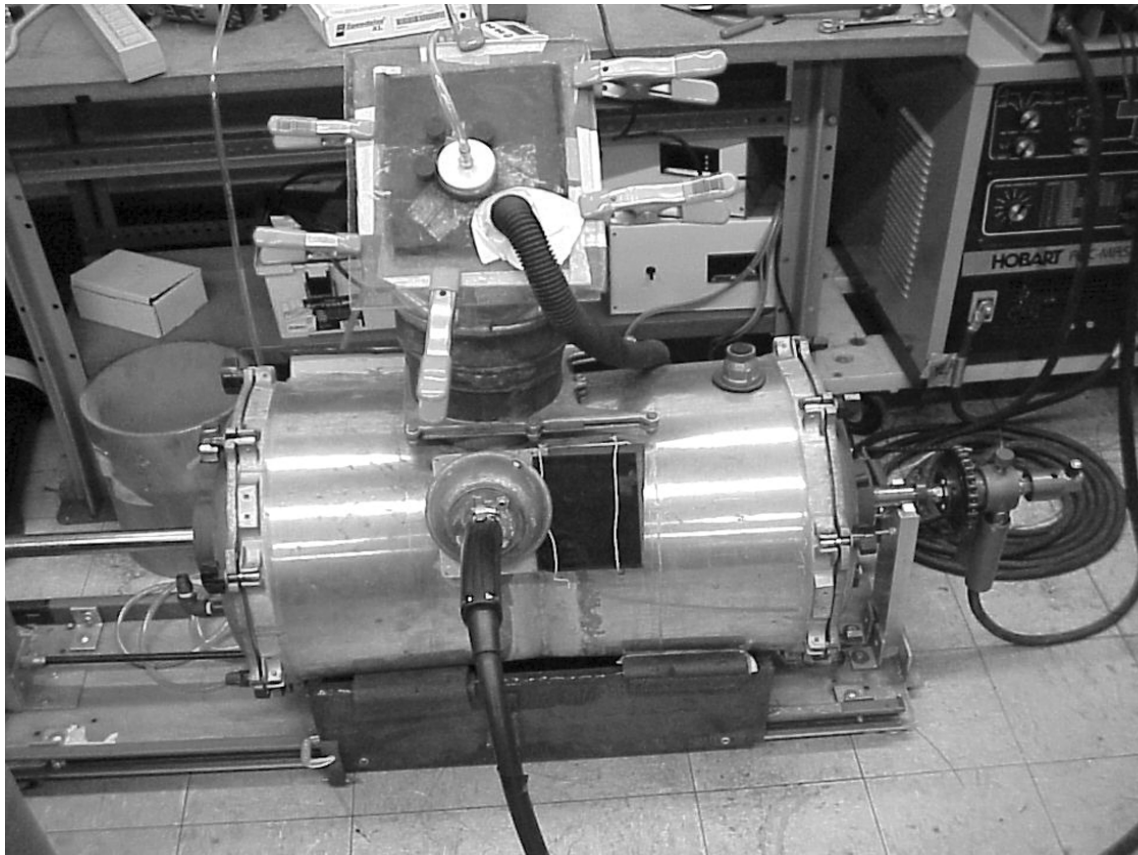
Welding fume collection chamber with welded pipe.
